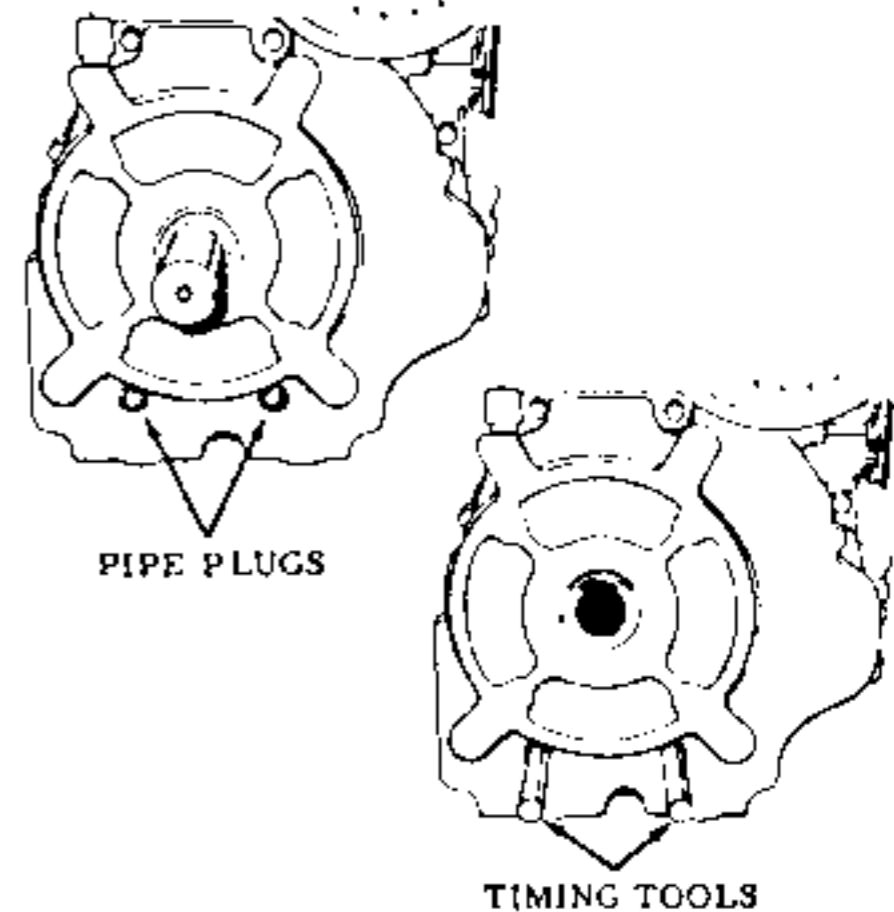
To time engine balancer gears, remove pipe plugs and insert timing tools #670239 through crankcase cover and into slots in balancer gears. Refer also to Fig. T81.
